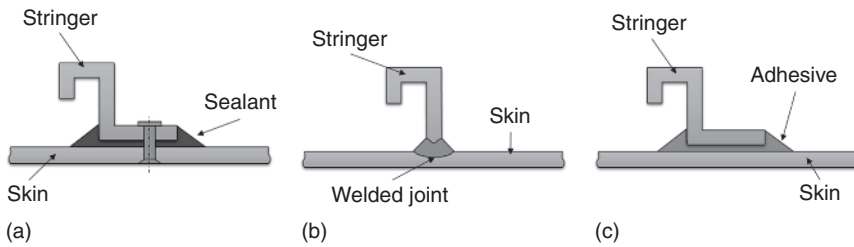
Three different joining techniques typically used in aeroplane structures. (riveting (a), welding (b) and adhesive bonding (c)).
